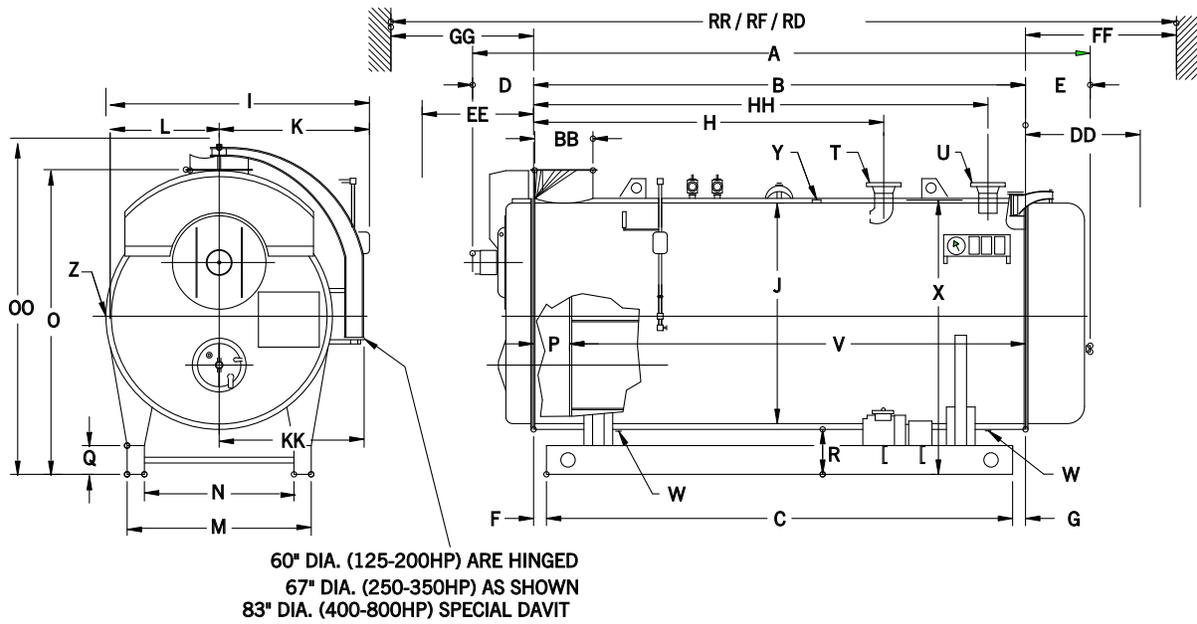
Model CBR Hot Water Boiler Dimensions - Sheet 1 of 2
